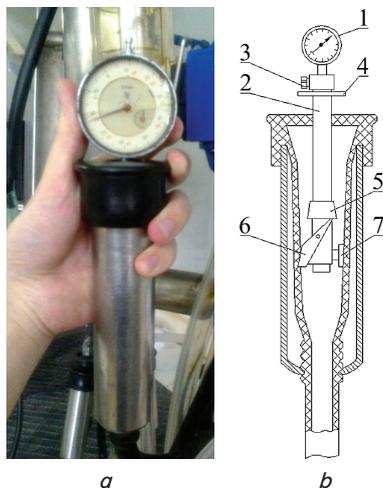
Device for determining the tension of milking rubber in milking cups: *a* – physical appearance; *b* – device diagram: 1 – counting unit; 2 – body; 3 – fixing screw; 4 – stop; 5 – movable bushing; 6 – rotary lever; 7 – stationary insert
